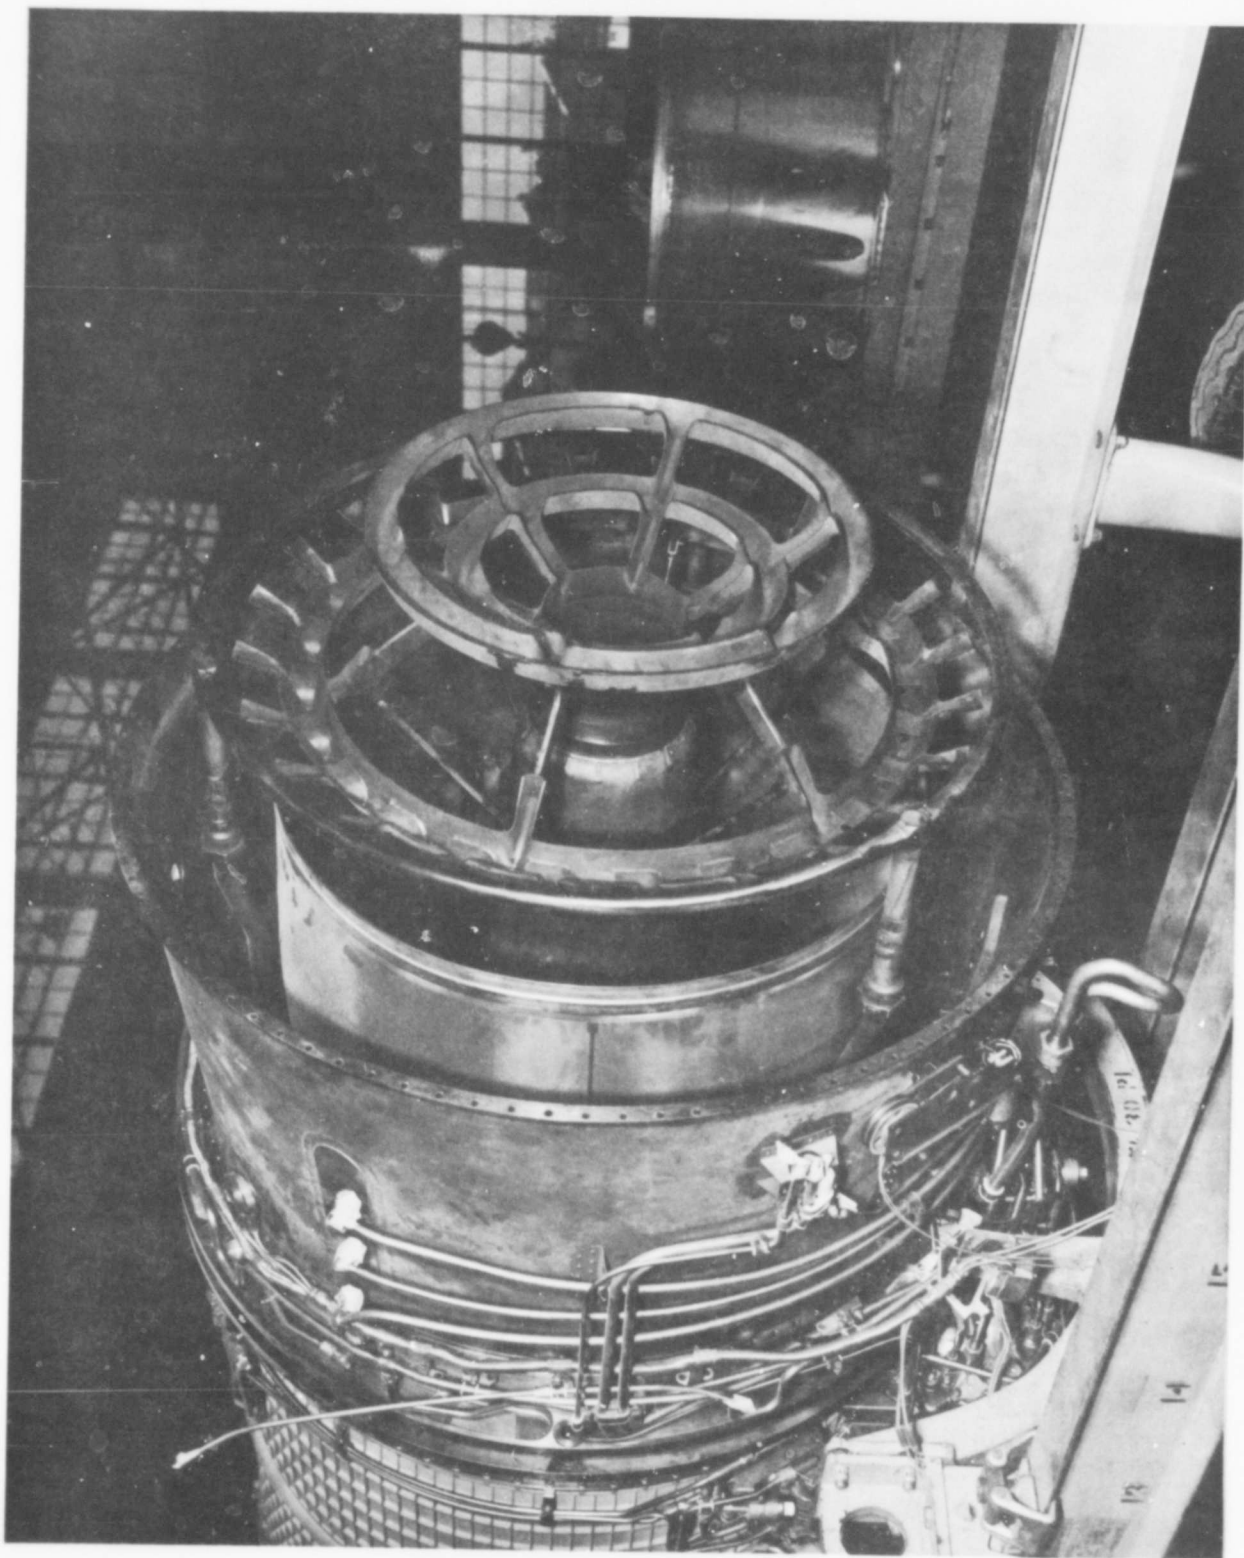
MODIFIED FLAMEHOLDER ASSEMBLY INSTALLED (SIDE VIEW)
